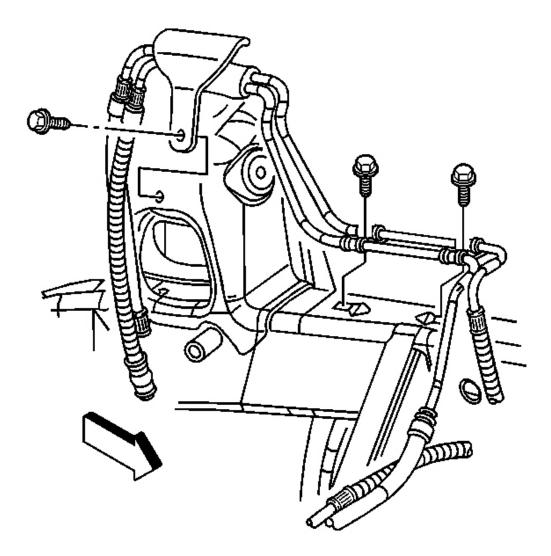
View Of Power Steering Hose Assembly & Bracket At Wheel Well Courtesy of GENERAL MOTORS CORP.
